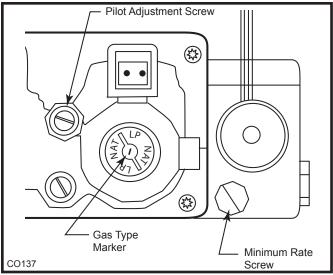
Remove black plastic cap and adjust rotary knob to correct gas type. (LP position shown) Replace minimum rate screw with one supplied in conversion kit.
